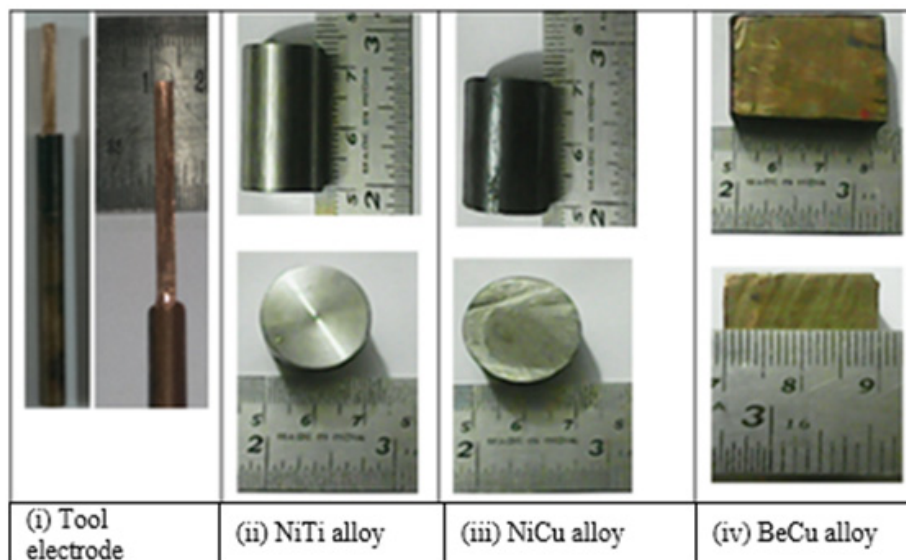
shows an electrical discharge machine. Cryo-treated and untreated copper tool electrodes were used to drill mesoscale square holes of 3 mm × 3 mm with a 5-mm depth onto cryo-treated and untreated workpiece surfaces. In Figure 1b, the top surface of the workpiece was adjusted to be parallel to the tooltip surface using a dial gauge in order to make the electrode setup. The workpiece materials selected were Monel (NiCu) alloy, NiTi alloy and BeCu alloy. Known for their unique properties, these advanced materials have become promising candidates for all types of industries. Literature on the EDM of these alloys is sparse in terms of research papers and books. In addition to NiCu and NiTi alloys of 20 mm × 20 mm × 20 mm, BeCu alloy of 20 × 20 × 30 mm³ was used. Because electrolytic copper has a high electrical conductivity, it was chosen for experimentation. From the market, we purchased a copper rod measuring 6 mm in diameter and 2000 mm in length. After that, it was cut to 6 mm in diameter and 90 mm in length. Using a milling machine, these pieces were then machined into 3 mm × 3 mm × 25 mm pieces. Figure 1c depicts the workpiece and tool electrode used in the present study. Listed in Table 1 are the chemical, physical and thermoelectric properties of the materials used for the workpieces and tools.
